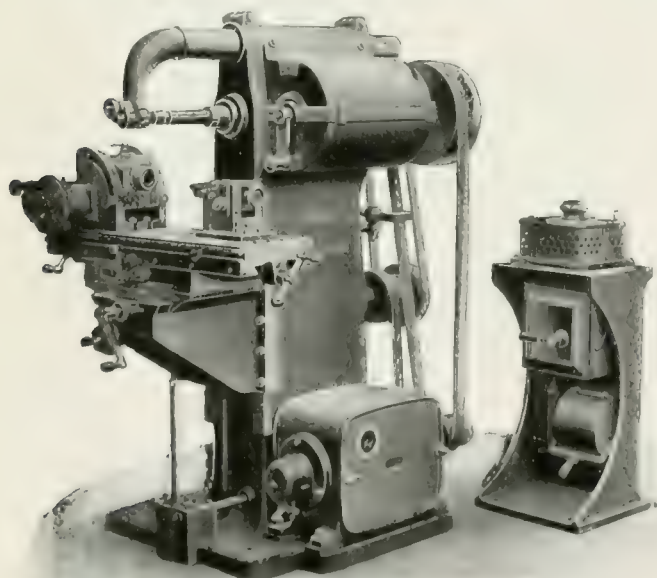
Tangye Milling Cutter belt-driven from D.C. Motor.
